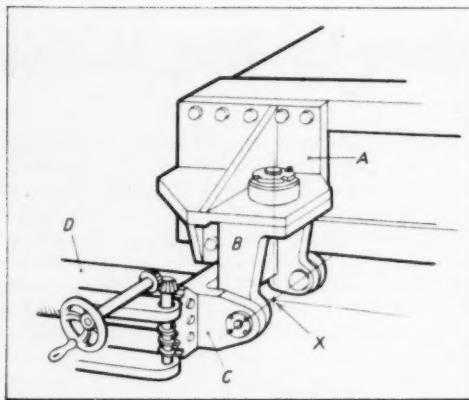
Details of the Mounting Arrangements for One End of the Beam which Carries the Cutter Head are here Shown Diagrammatically
